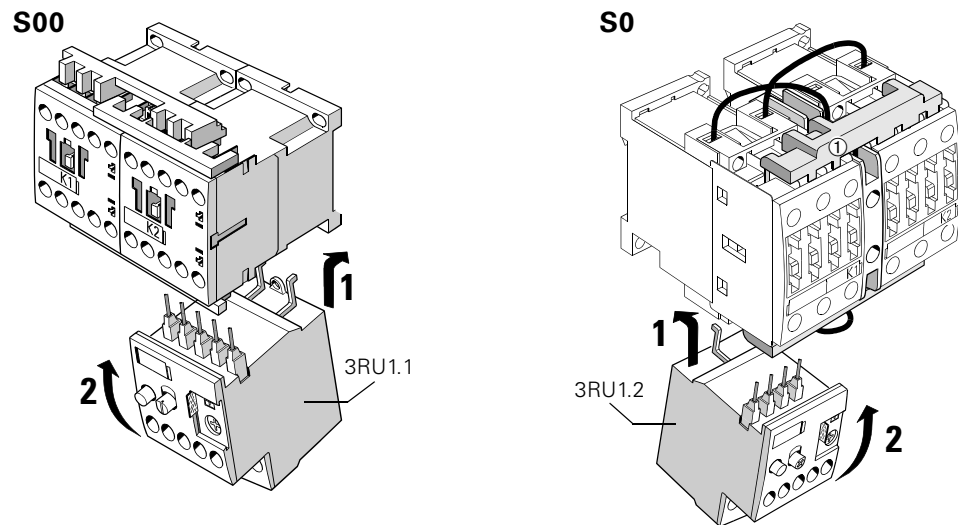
Fully assembled contactor combination for reversing (frame sizes S00 and S0)
